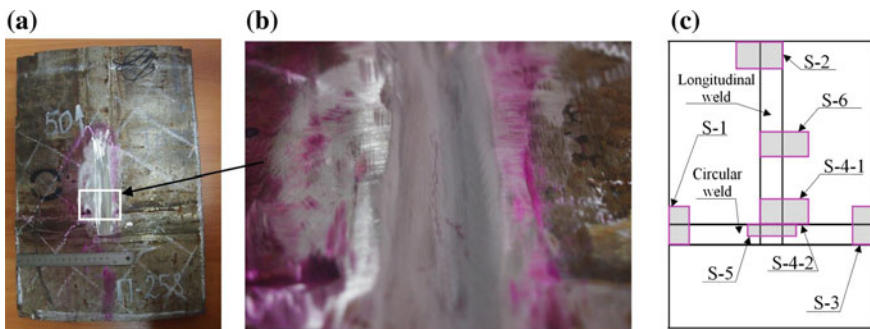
a Piece of shell that was cut out for the study; b crack indication in the longitudinal weld at capillary testing; c the scheme of cutting of specimens from the piece of shell for metallographic investigation of welds
